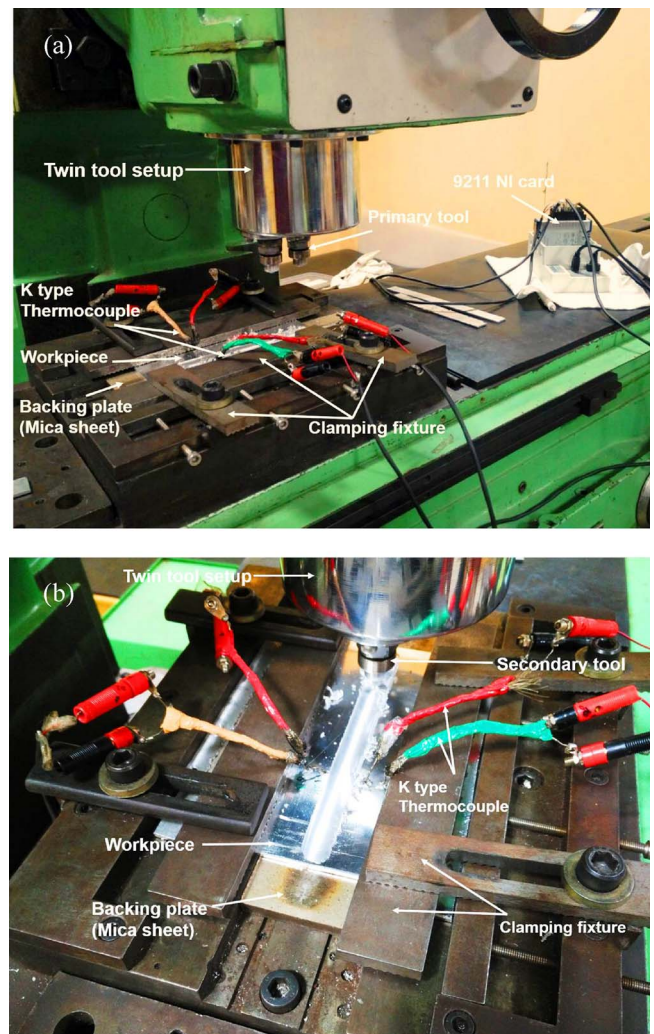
(a) Experimental setup for TT-FSW (b) enlarged view of the fixtures.
